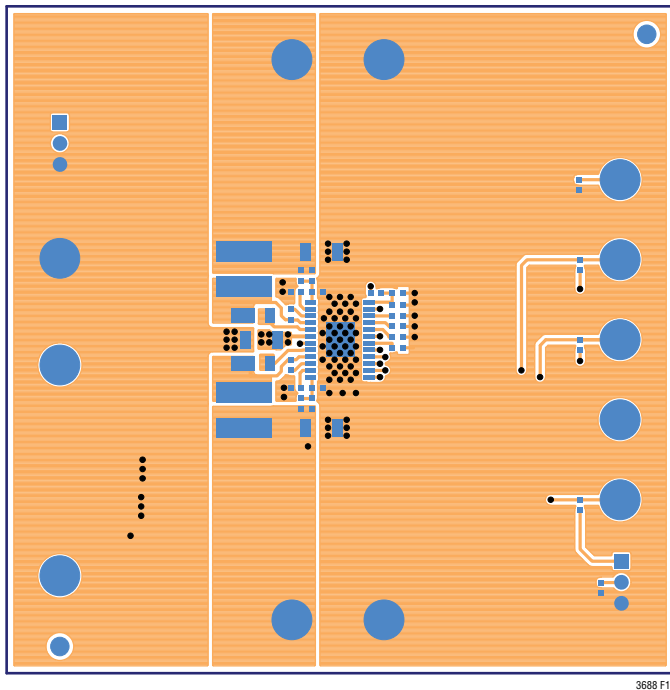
Top Layer PCB Layout in the LT3688 Demonstration Board
